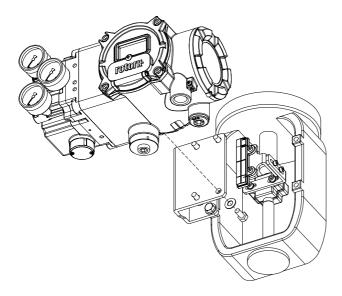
Assembling the Positioner onto the mounting bracket
